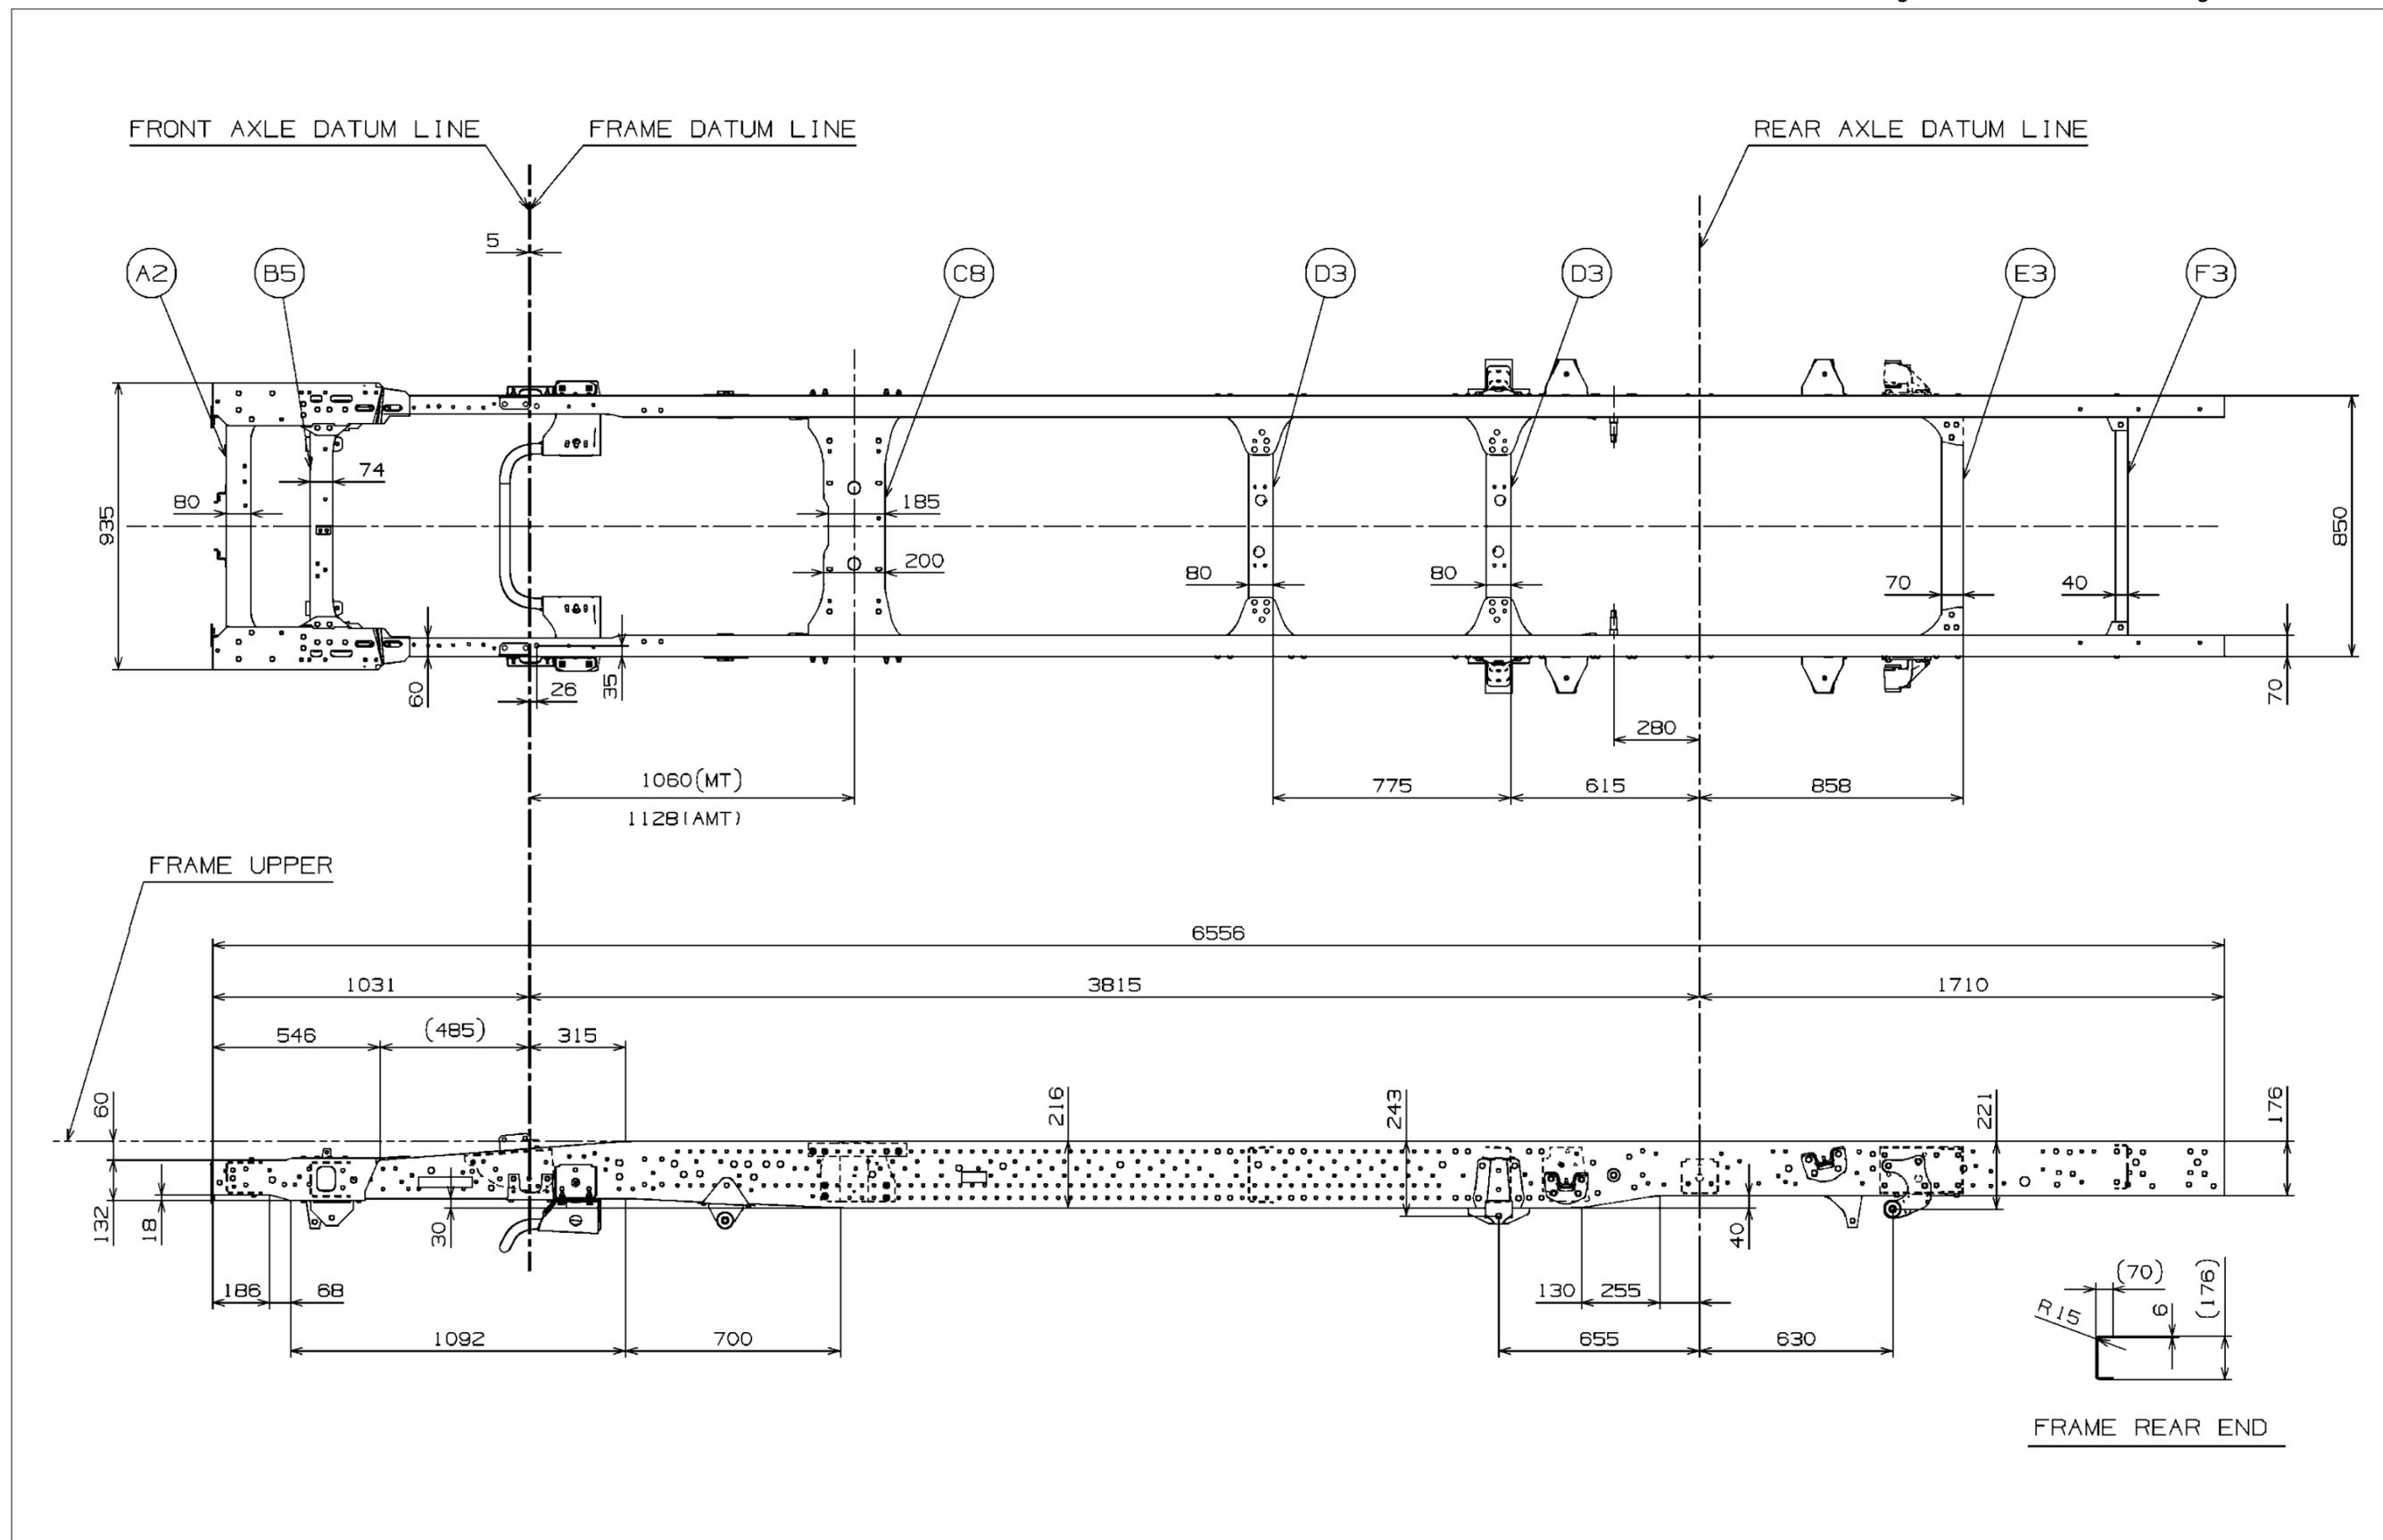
Chassis Frame Drawing NPR85L/U-ML5VAYE
